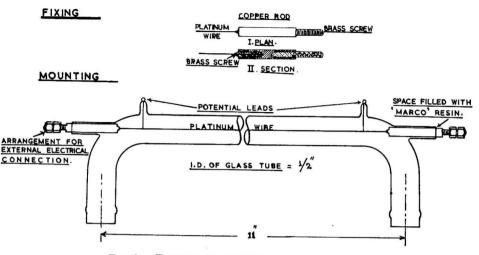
FIXING AND MOUNTING OF PLATINUM WIRE.
